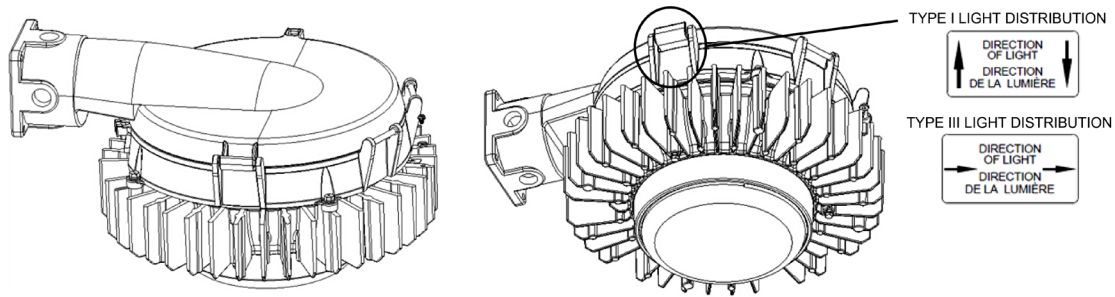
MULTI-HINGE WALL HOOD DETAIL
